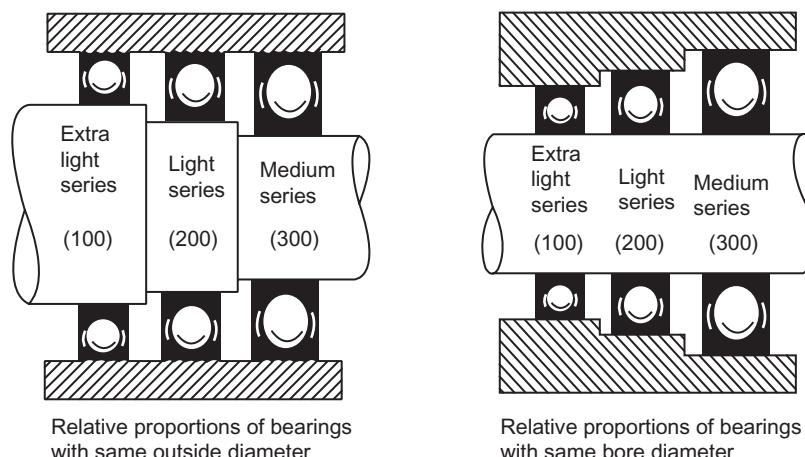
Ball bearing size of bearing series. (Courtesy: New Departure-Hyatt Bearing Division, General Motors Corporation.)
